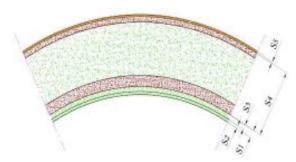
S1: Internal liner, S2: Surface layer, S3: Barrier layer, S4: Structural layer, S5: External layer
